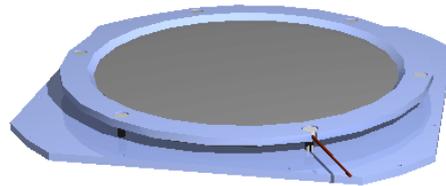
Assembly of MCP-stack - Stage 3-3 (DLD120 and HEX120)
